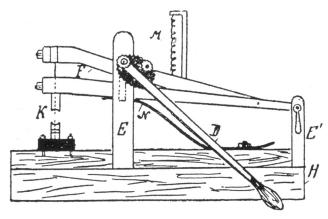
"Körnel pressing machine" (*Körneldruckmaschine*) (Parkert 1925:186).
